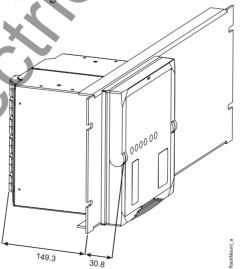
2 Relay (case and plug-in unit) rack mounted.
